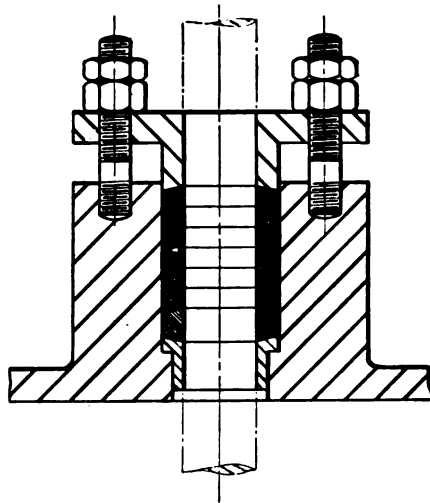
BARCLAY PISTON ROD PACKING.
